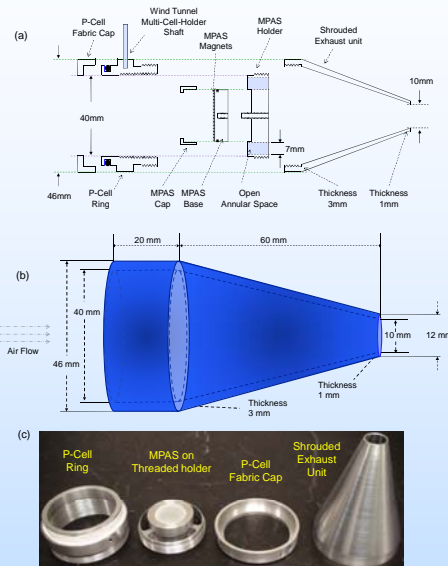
The Prototype 2 with multiple components: a) schematic side view (drawing approximate to scale); b) picture side view; and c) photograph of the components
